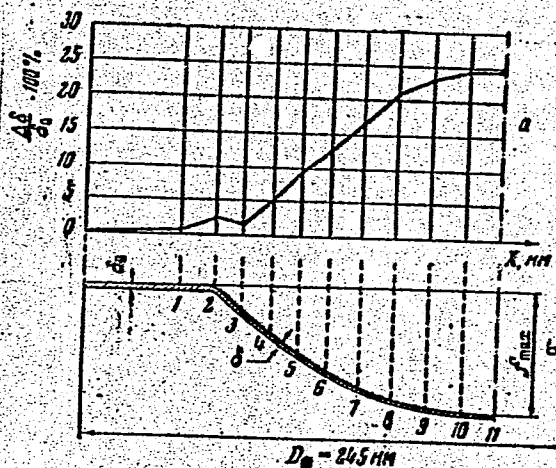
Distribution of thickness reduction (a) and shape of the part (b) explosively formed from TsSDM alloy sheet 1.012 mm thick (die diameter, 150 mm)
